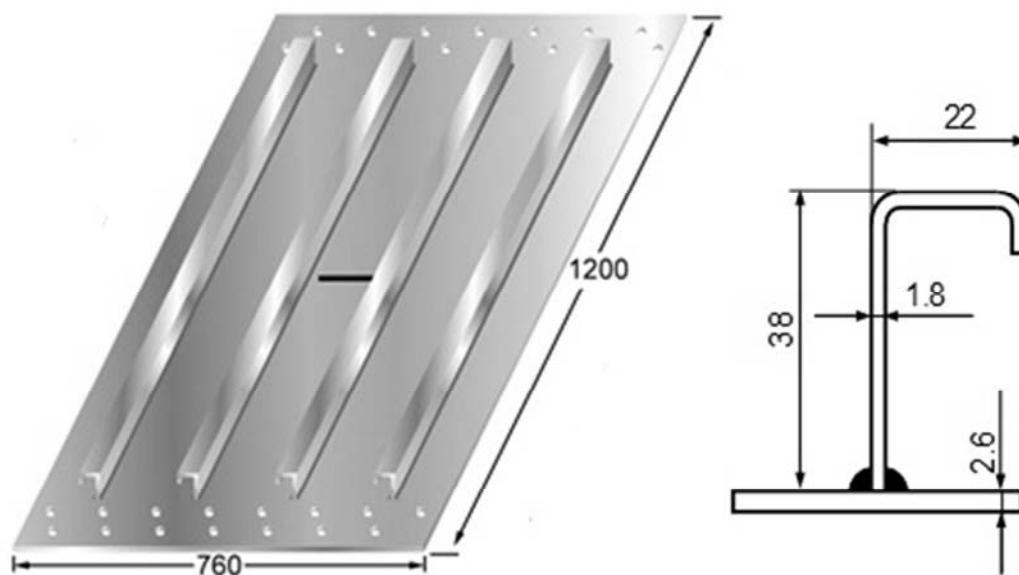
Dimensions of the 4-stringer panel made of AA6156-T6 aluminum
